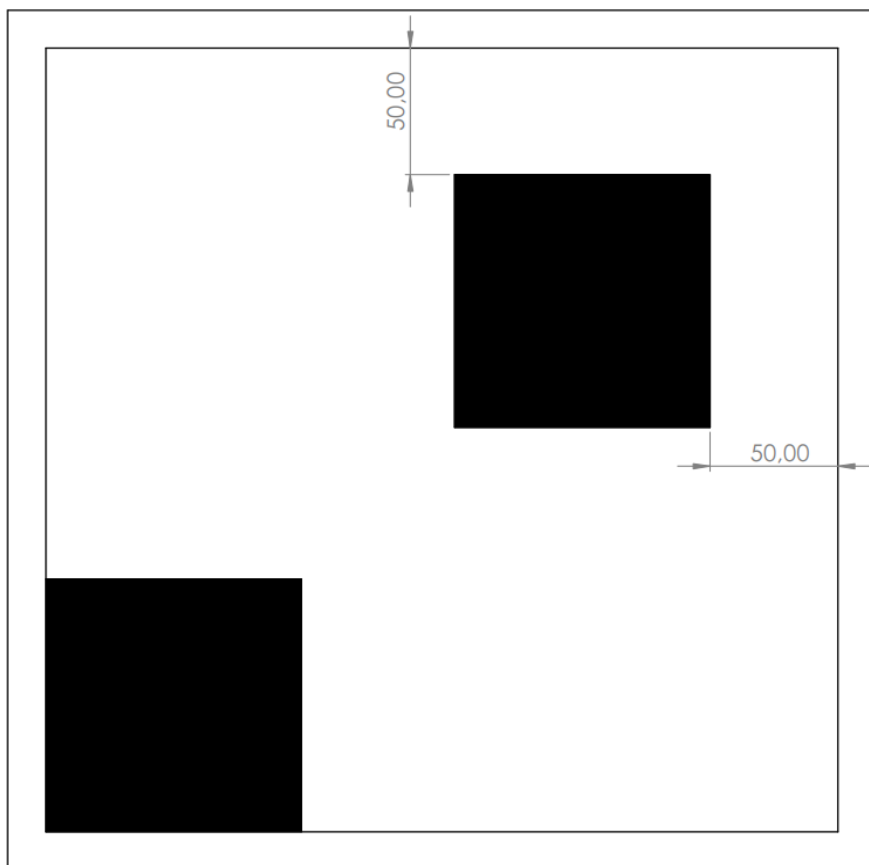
POSITION OF THE 3D PRINTED PIECES (REPRESENTED IN BLACK) INSIDE THE MOULD.
